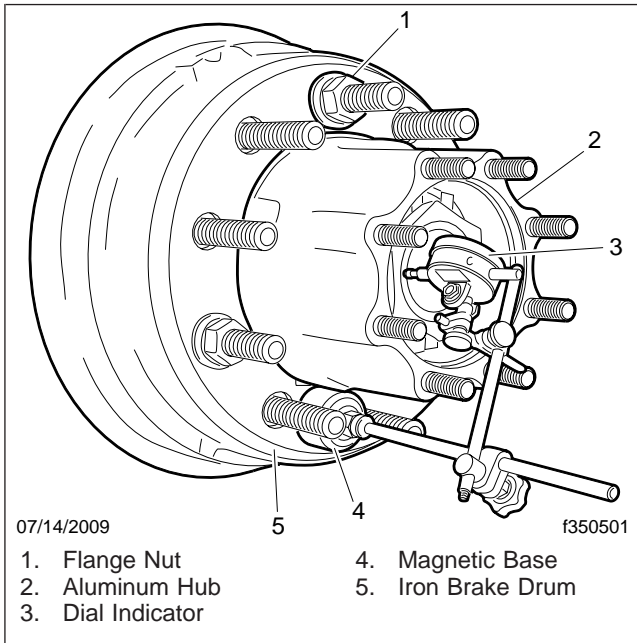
, Dial Indicator Setup, Aluminum Hub with Iron Brake Drum
